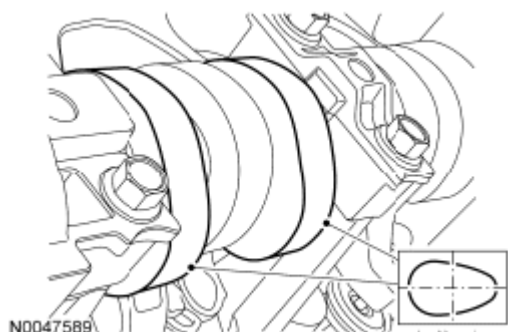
Identifying No. 5 Cylinder Camshaft Exhaust Lobe
